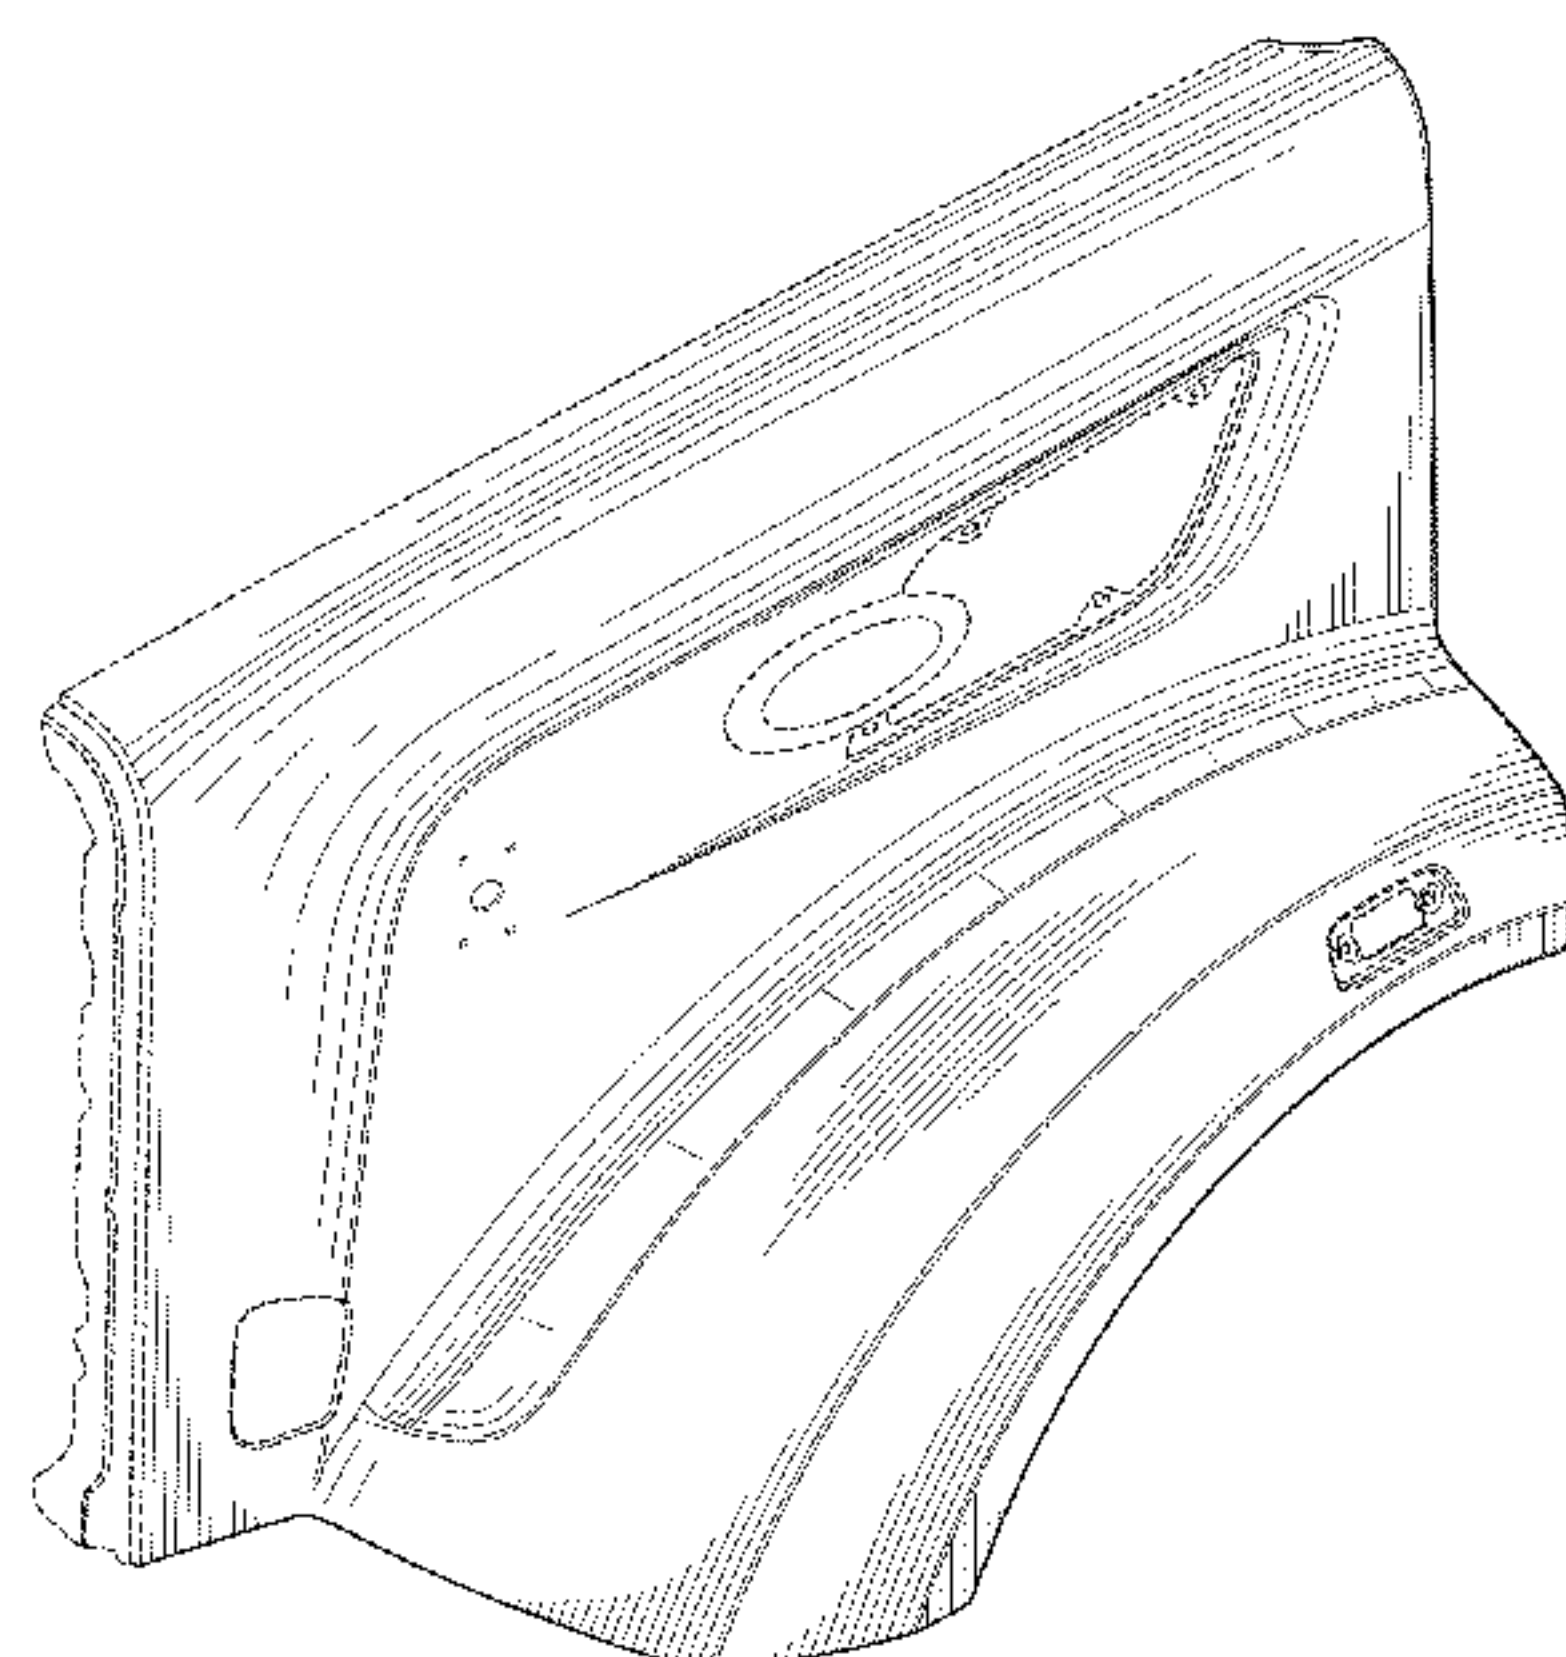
is a left side elevational view for the hood side of FIG. 1; and,
